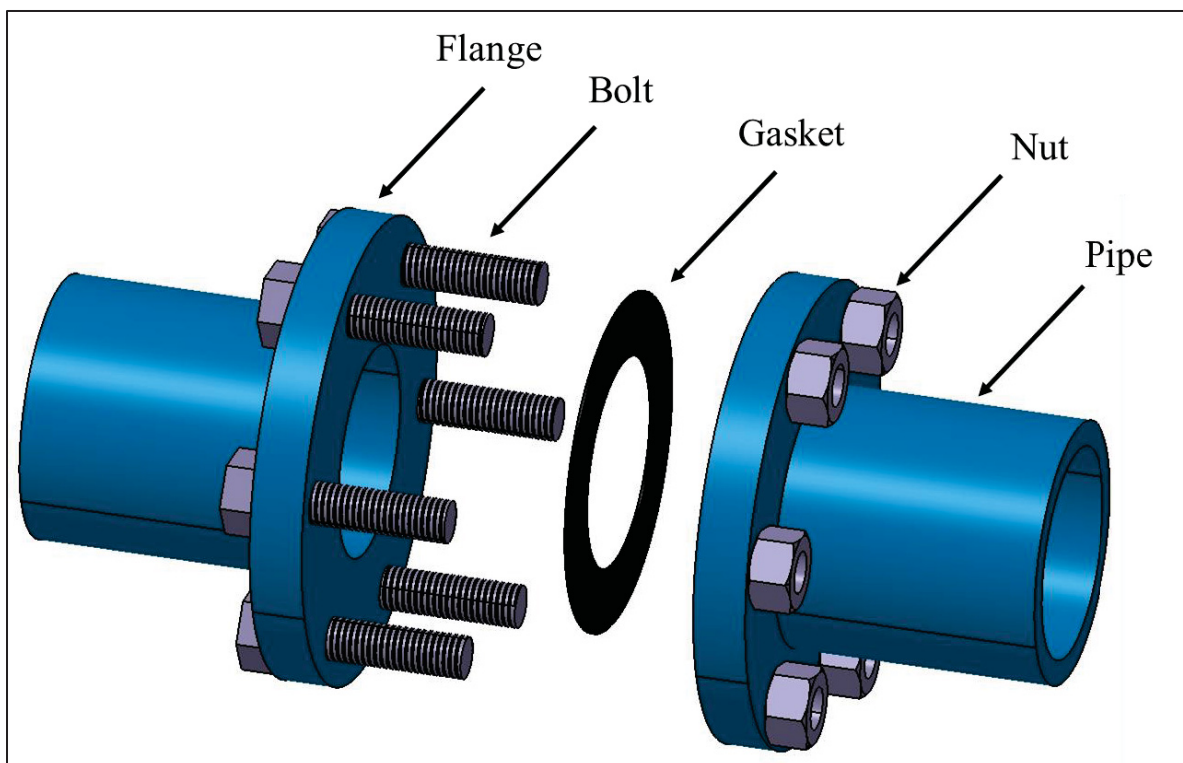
Schematic of a bolted flanged joint with a gasket placed between two flanges, and tightened by bolts
